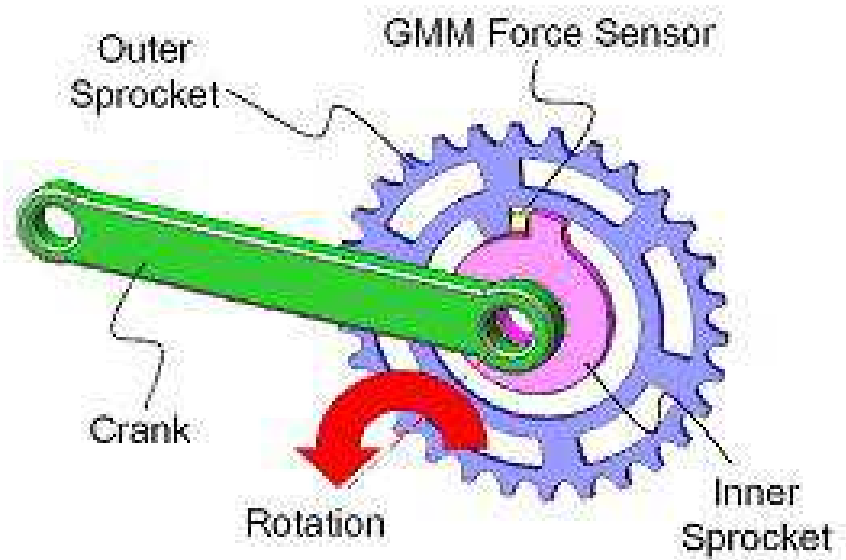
Schematic drawing of the sprocket and the GMM sensor
